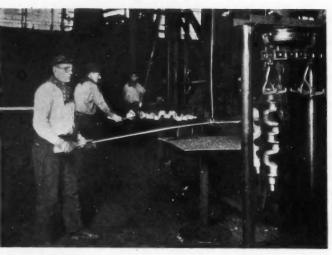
LOADING A FINISHED FORGING ON THE CONVEYOR
